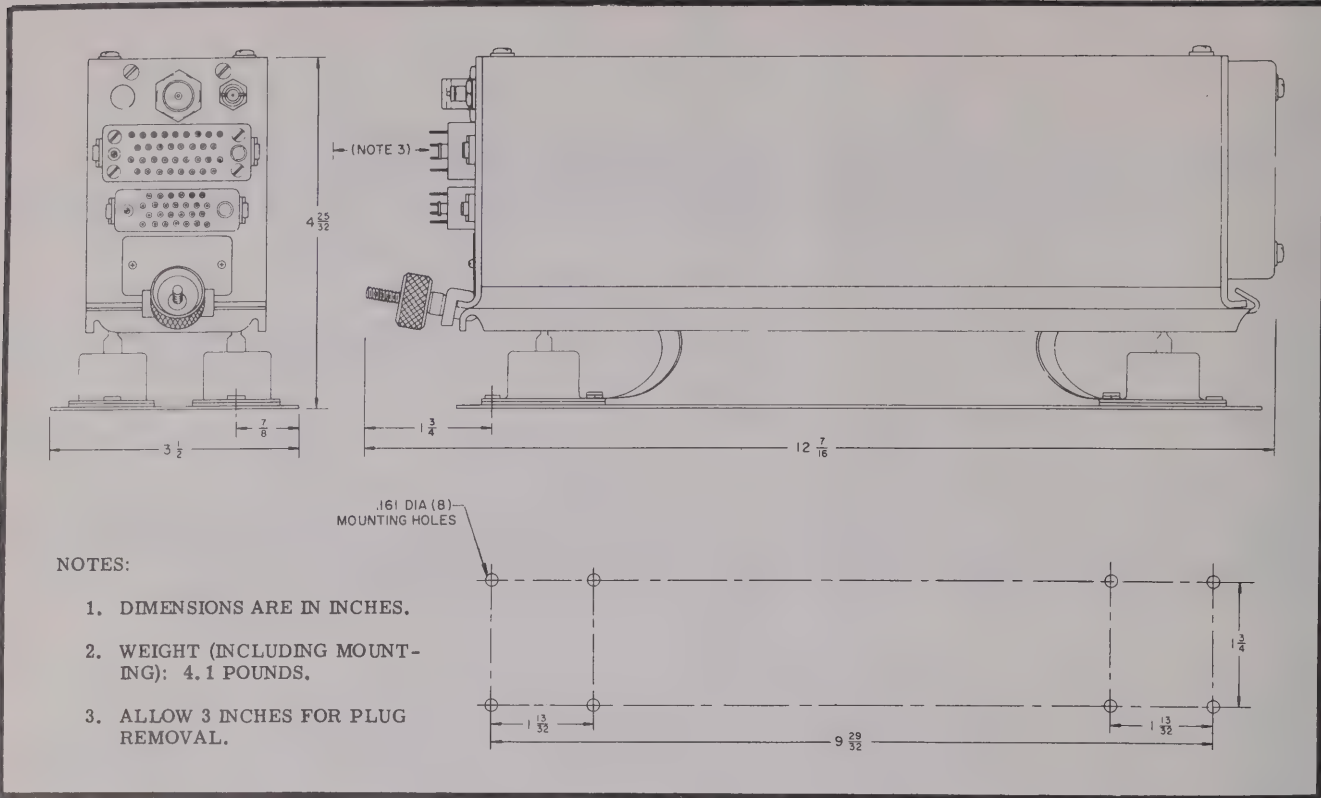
37260 Receiver-Transmitter with Mounting 36280, Installation Dimensions
